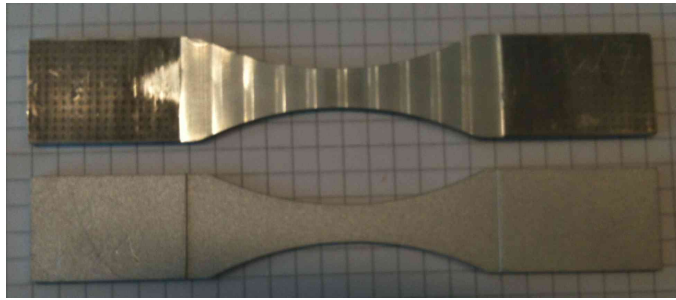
The as welded specimen (top) and the shot peened specimen (bottom) of AA6082.50-T6.
